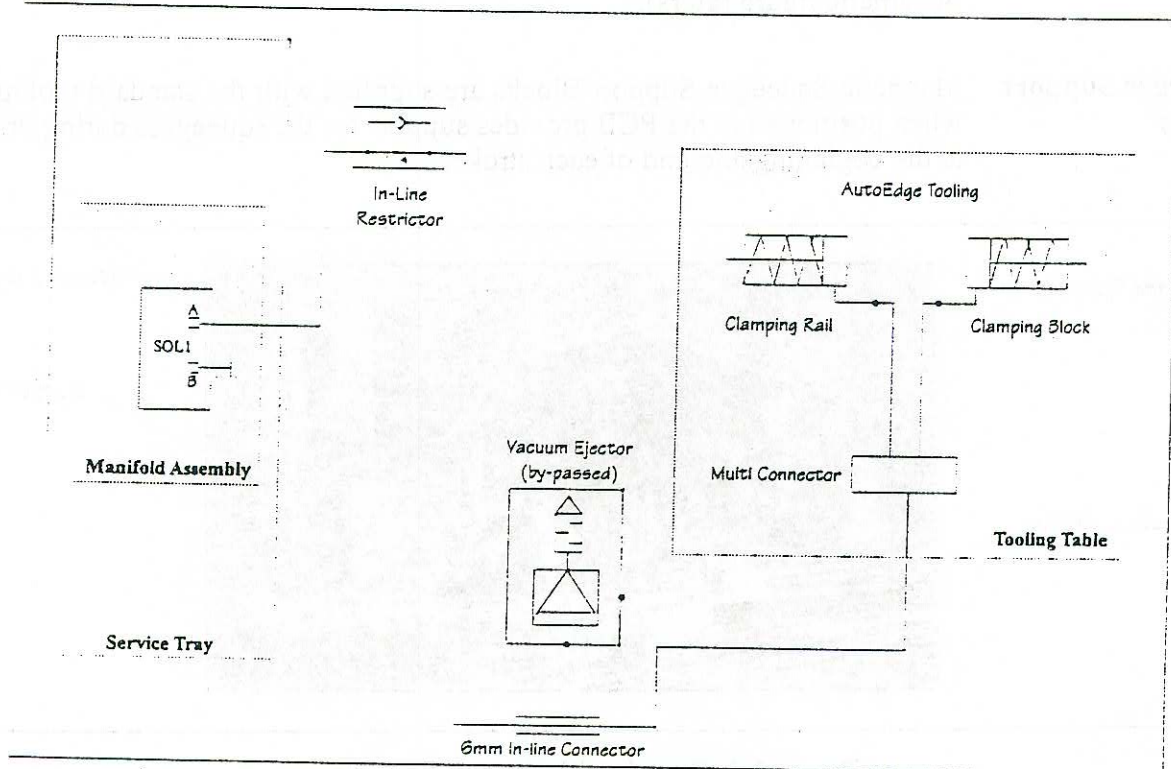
AutoEdge Tooling Pneumatic Circuit
